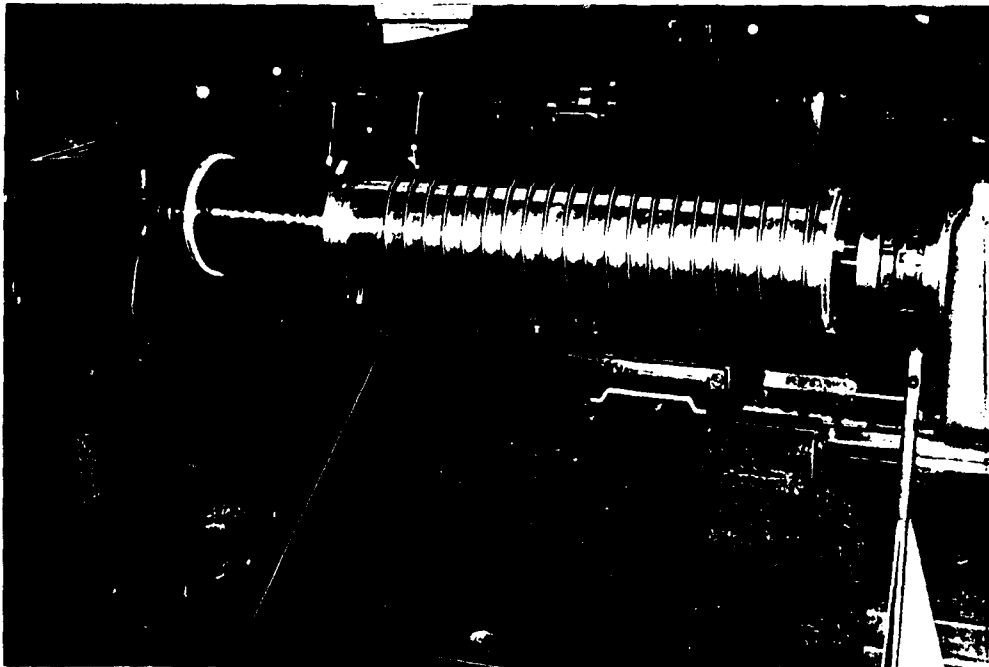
WINDING OF HELICAL BAFFLES ON TUBE #1
